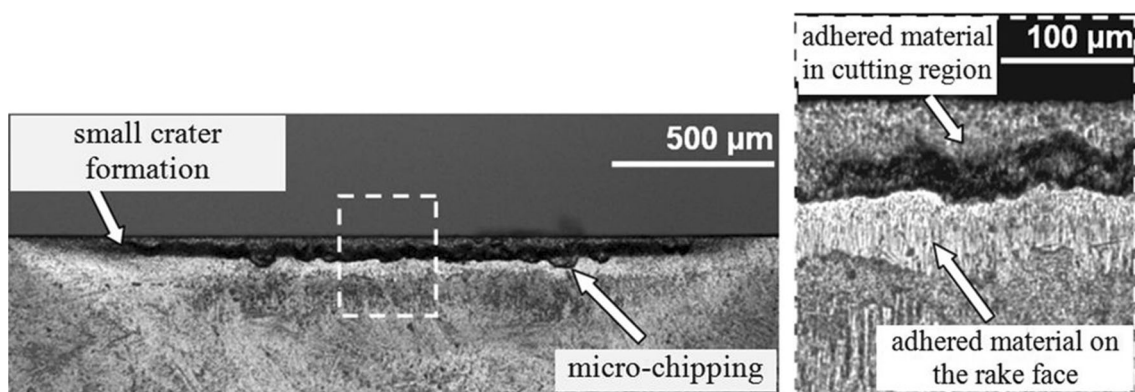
PCBN tool rake face of an E-shaped high-CBN content tool (CBN200E) at the end of the tool life when machining with $v_c = 180$ m/min
